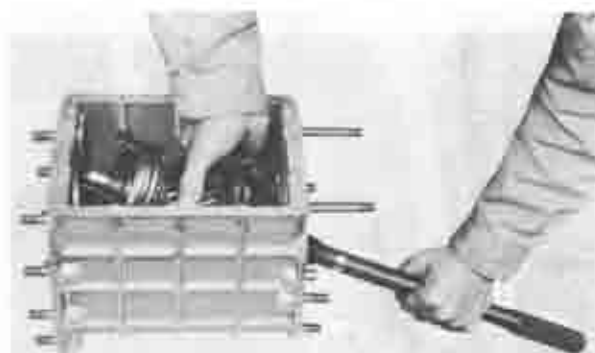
Installing clutch assembly (3rd & 4th)
